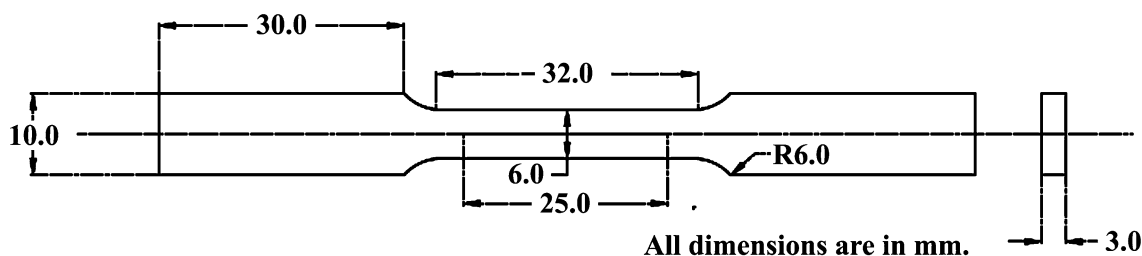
Geometry and dimensions of tensile specimen used in this investigation
